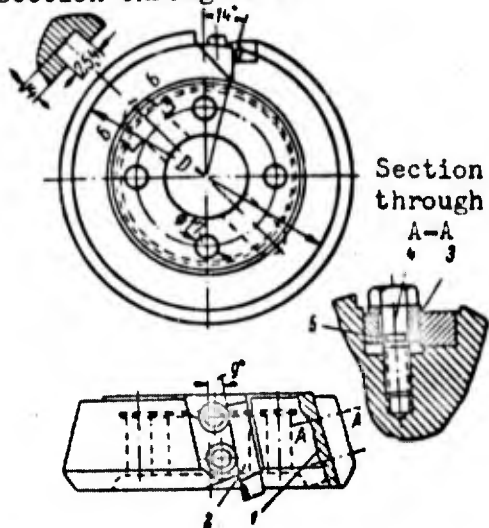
Design of Carbide-Tipped, 200 - 400 mm Diameter Inserted-Tooth End-Milling Cutter
